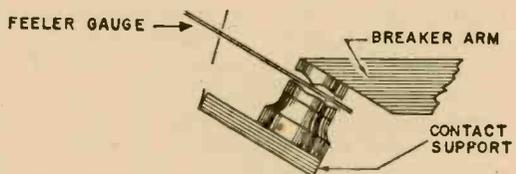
As shown in this side view of worn distributor points, use of a flat feeler gauge can give you an erroneous measurement.
